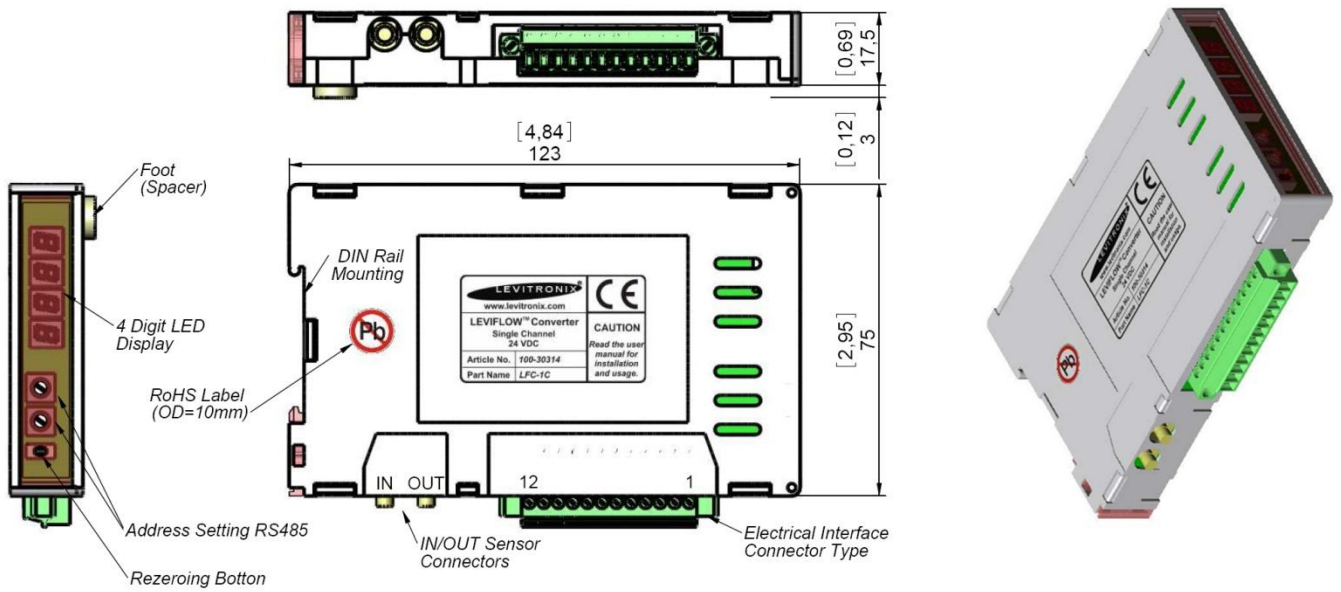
Dimensions and layout of interfaces of single channel converter LFC-1C / LFC-1C-F4
